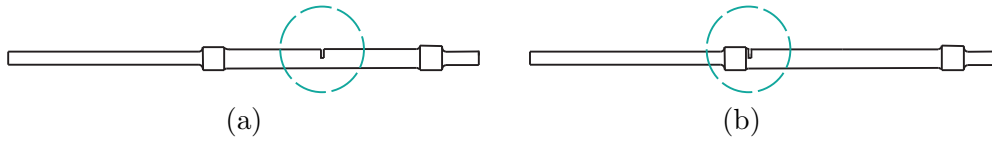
Positions of cracks induced in the shaft (a) middle section crack (MSC) (b) side section crack (SSC)
